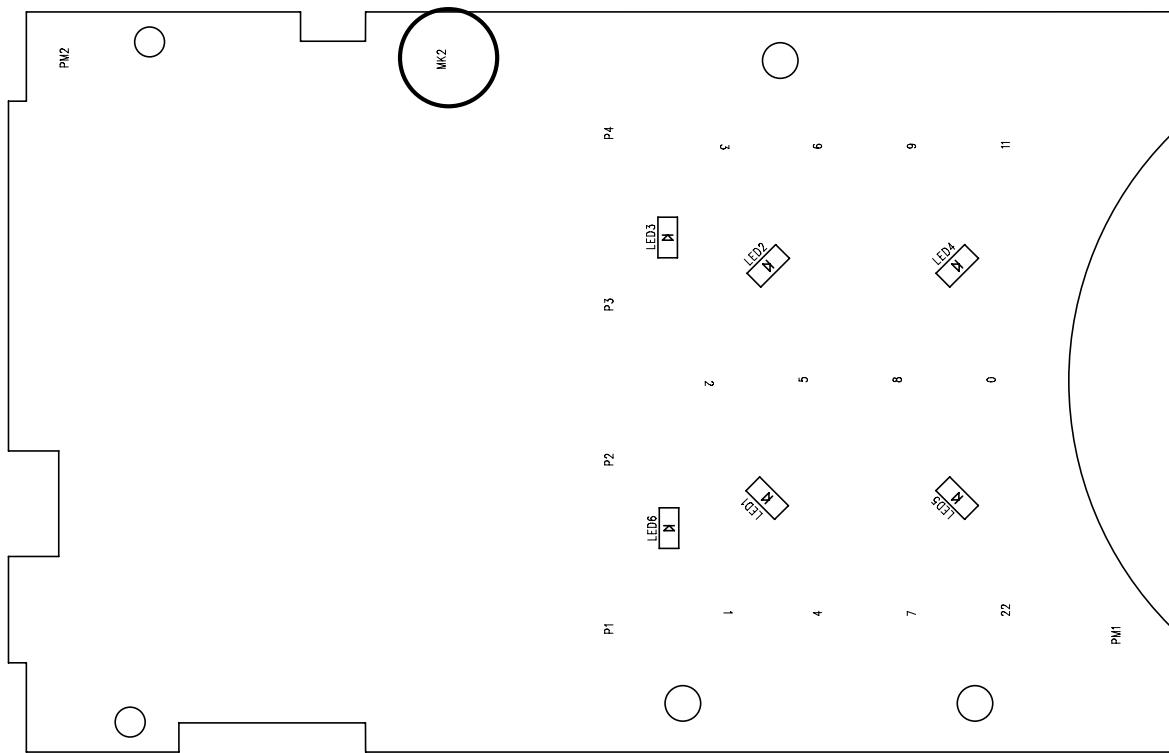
TP660 Main Board Top Side PCB View (136-174MHz)
